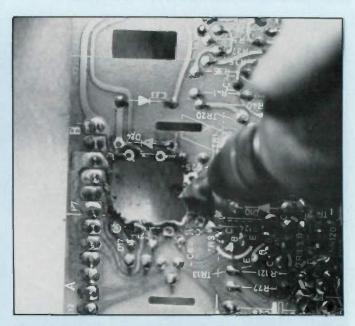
Remove the components from the damaged area, then being careful not to cause any cracks to spread into undamaged parts of the PC board, cut, chip, or grind away the burned parts of the board.
